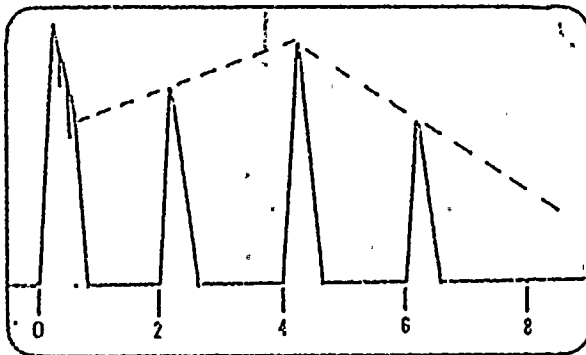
ULTRASONIC REFERENCE STANDARD, PIF-4.31C, FOR CLOSURE HEAD WELDS.
